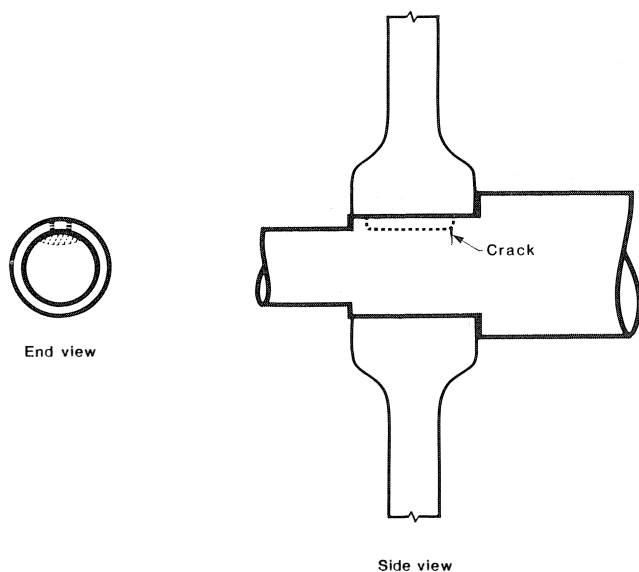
Transverse Crack Initiating From a Keyway.
